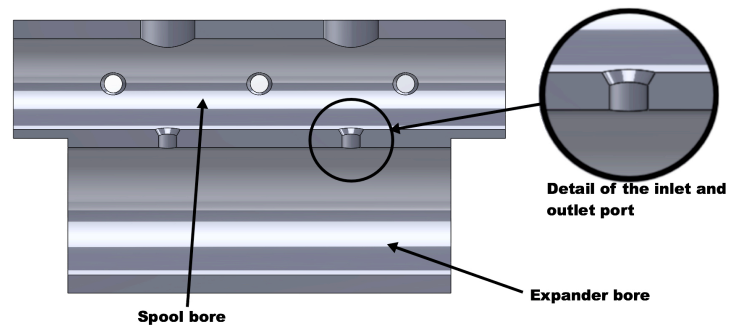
CAD model of the casing of prototype number 3. The inlet- and outlet-port is detailed
